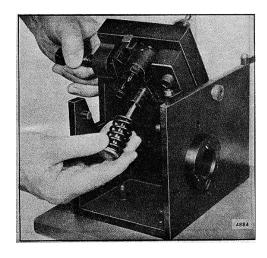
Removing or Installing Plunger Follower, Plunger and Spring
